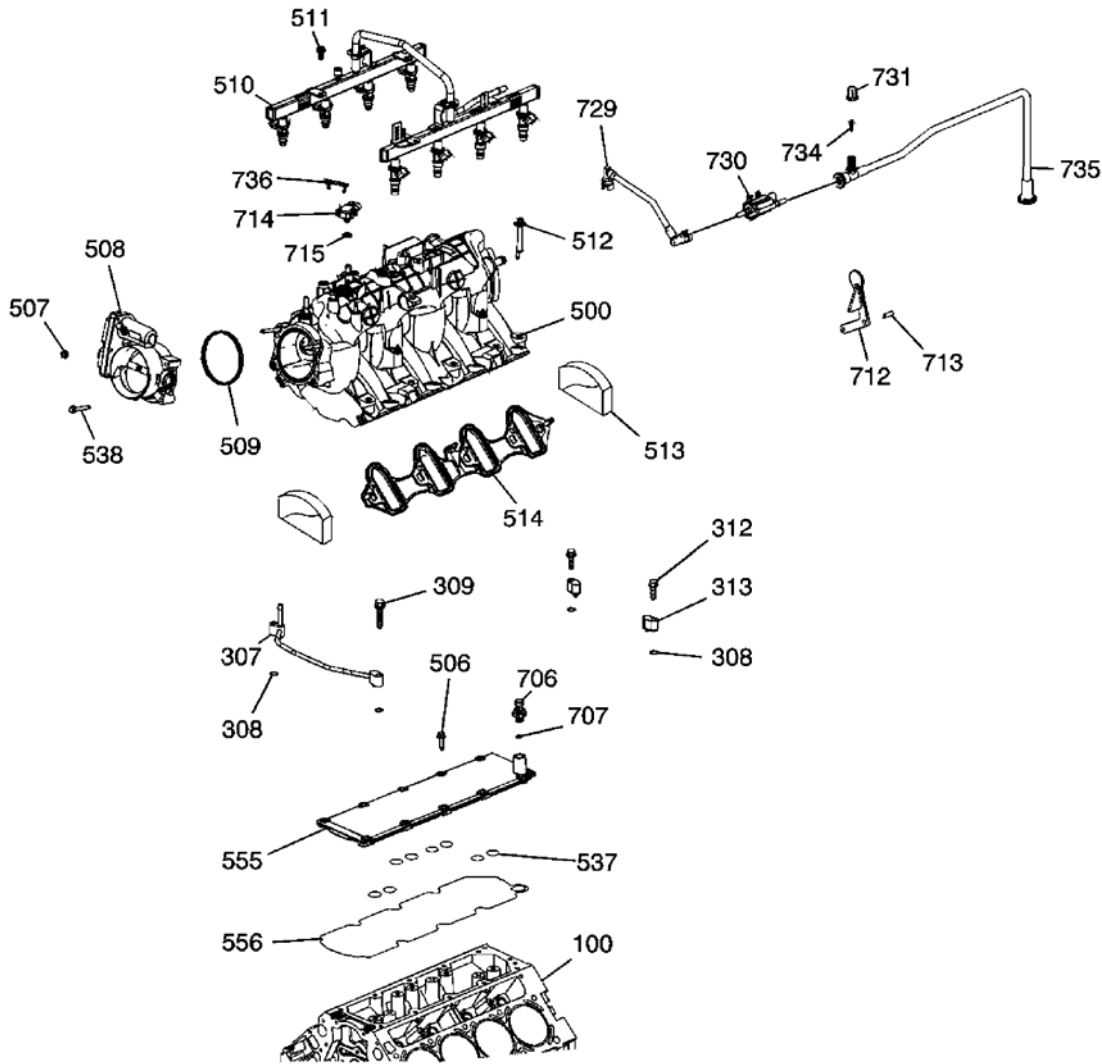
Disassembled View Of Intake Manifold/Upper Engine
